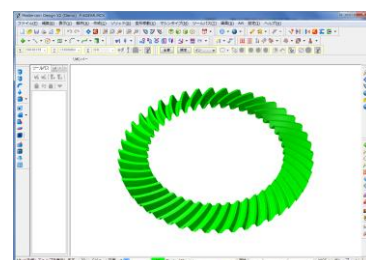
CAD- drawing example (Gear-3D-IGES)
